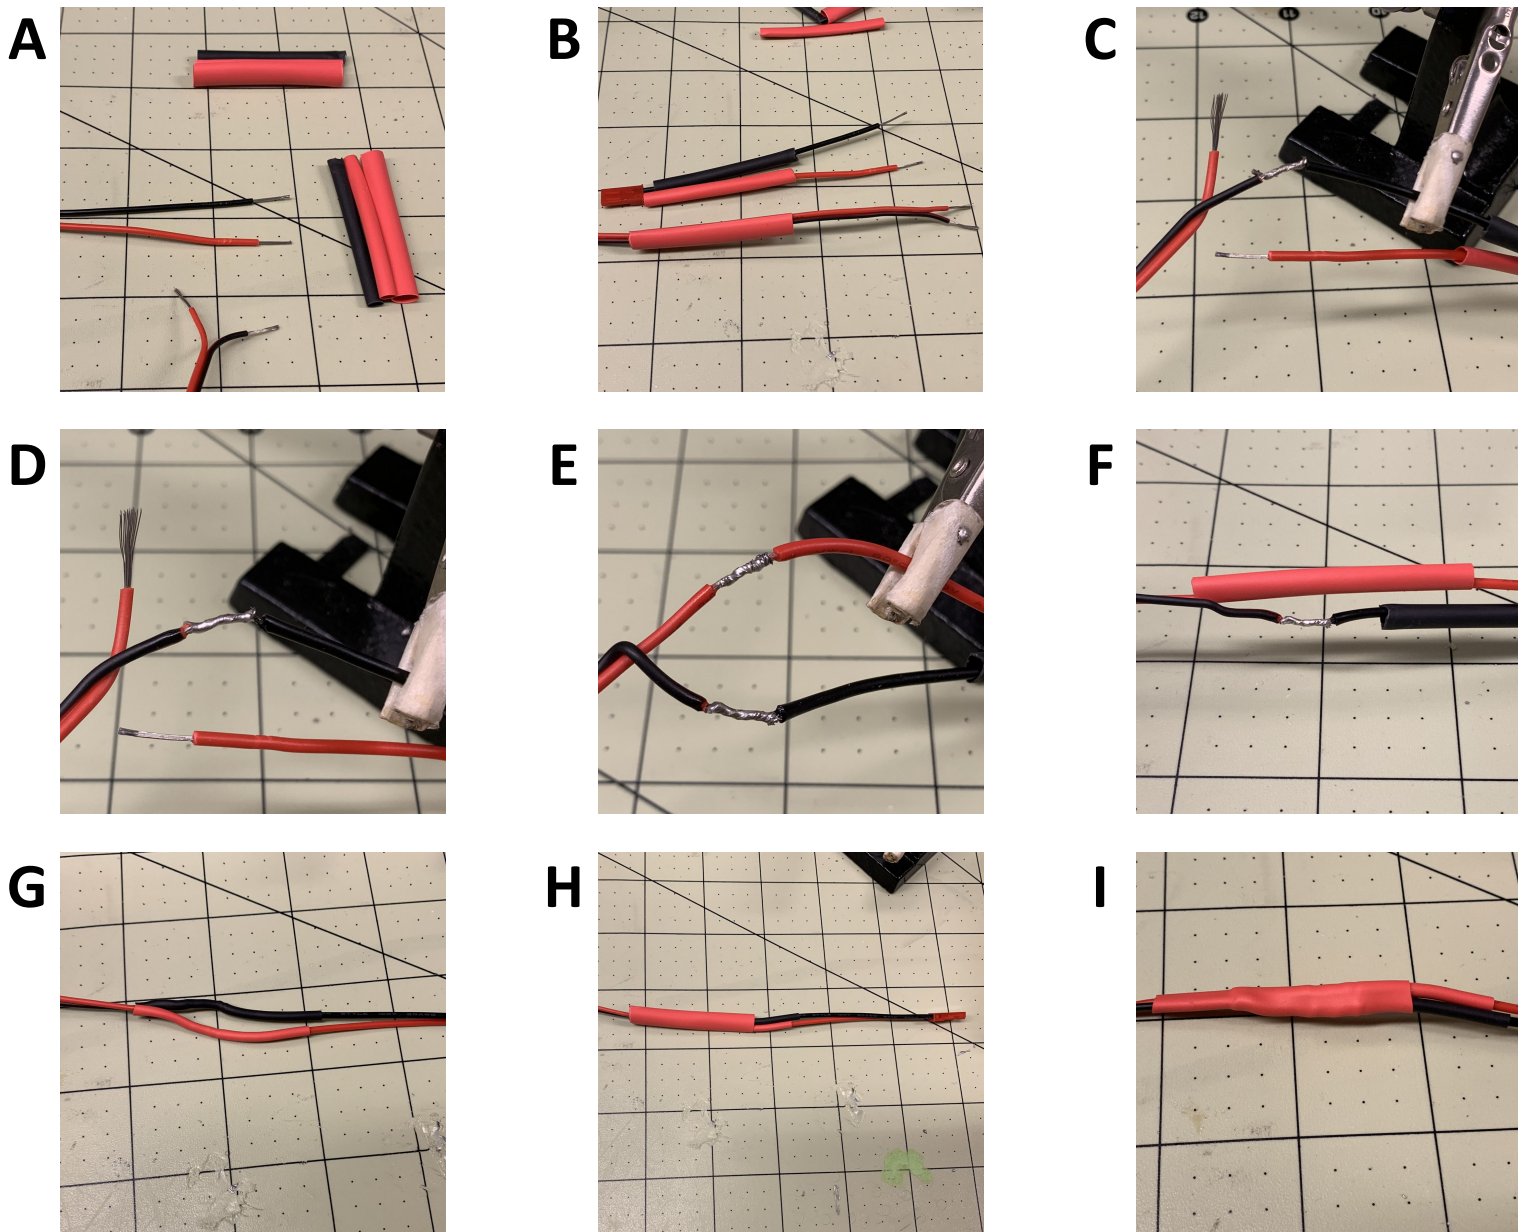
Connecting the LED wire to a male wire-to-wire connector. (A) Stripped wires and male wire-to-wire connector next to the shrink tube cut in half ($1/8''$ and $3/16''$). (B) Shrink tube placement over the wires prior to soldering. (C) Wires twisted together before soldering. (D) The soldered connection from the wire to wire-to-wire connector. (E) Both the red and black wires soldered together. (F) Placement of the $1/8''$ shrink tube over the soldered connection. (G) The shrink tube after shrinking with the heat gun. (H) Placement of the $3/16''$ shrink tube over the smaller shrink tube. (I) The connection soldered and sealed with shrink tube.
